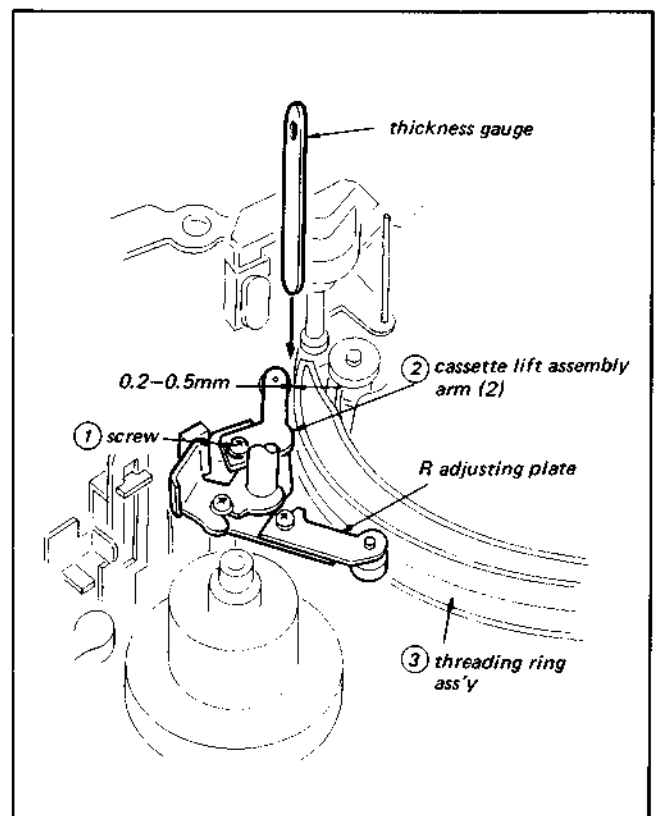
Clearance adjustment of cassette lift assembly arm
